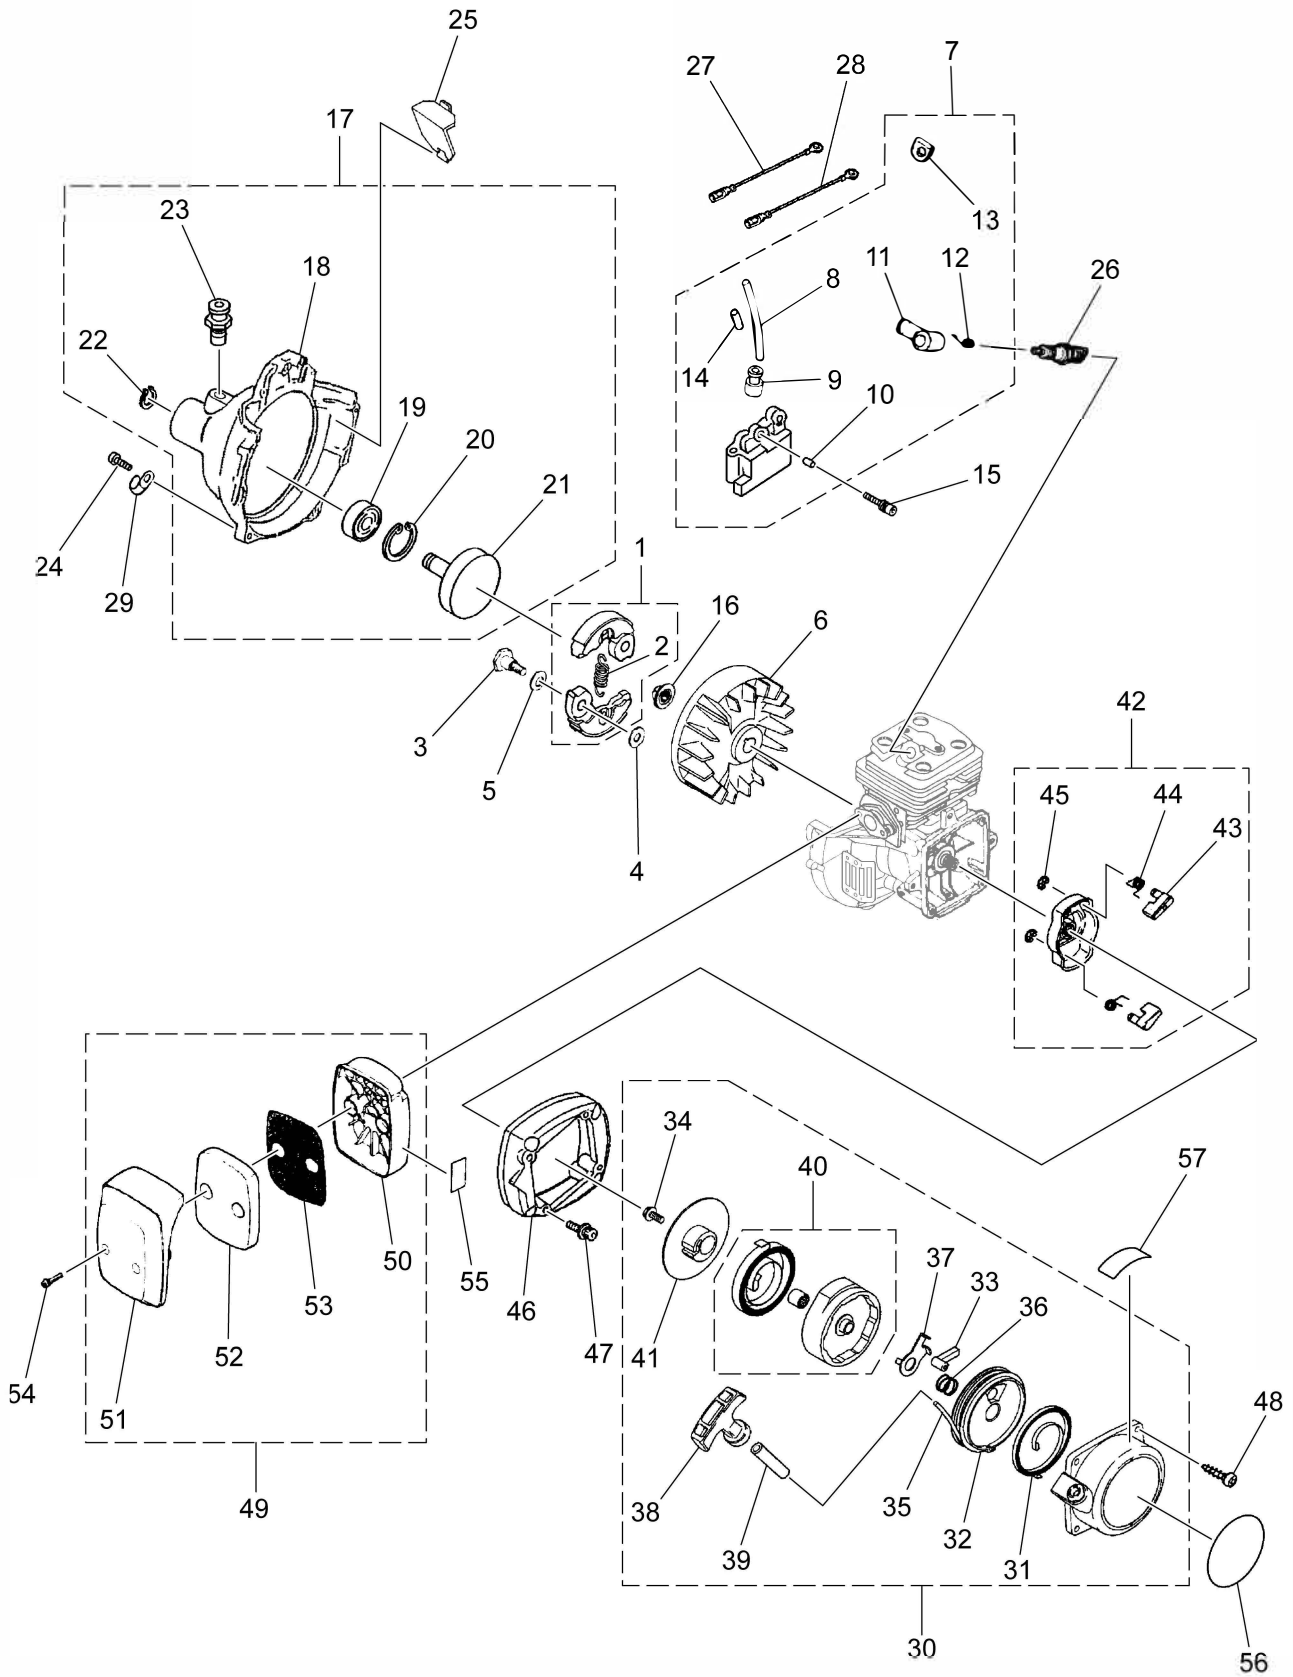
BK4302FL/ BK4302FLJ ENGINE UNIT 02
